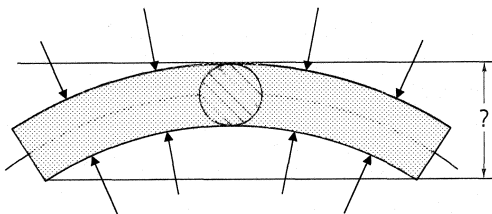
Caliper Measurements Do Not Measure Form. Illustration shows a cylindrical part.
